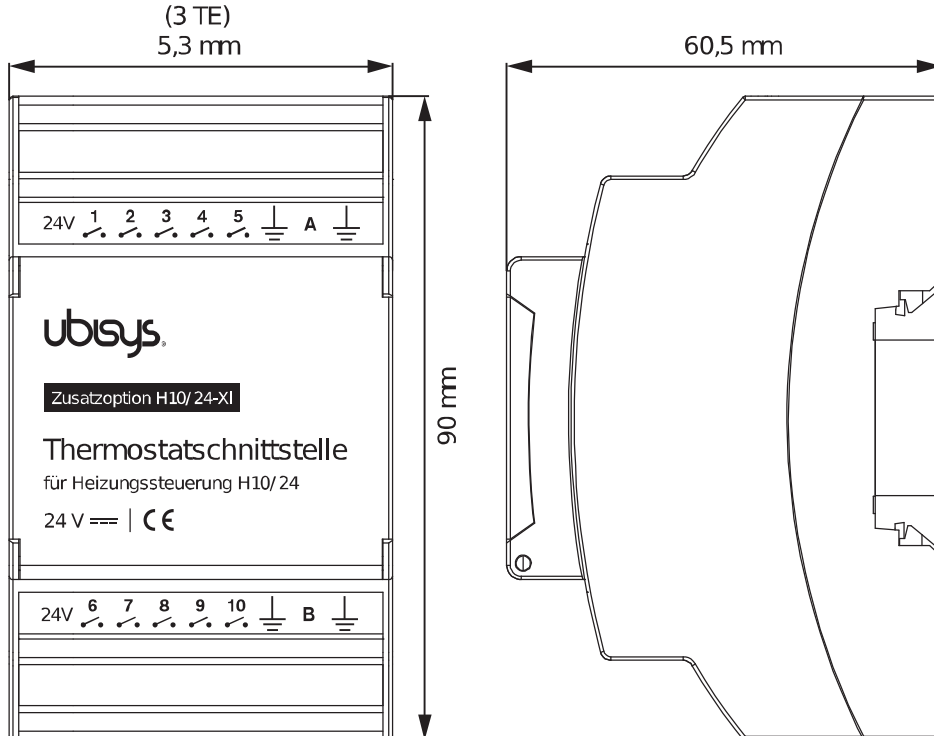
H10/24-XI Wired 24V= Thermostat Interface Extension Module – Dimensions
